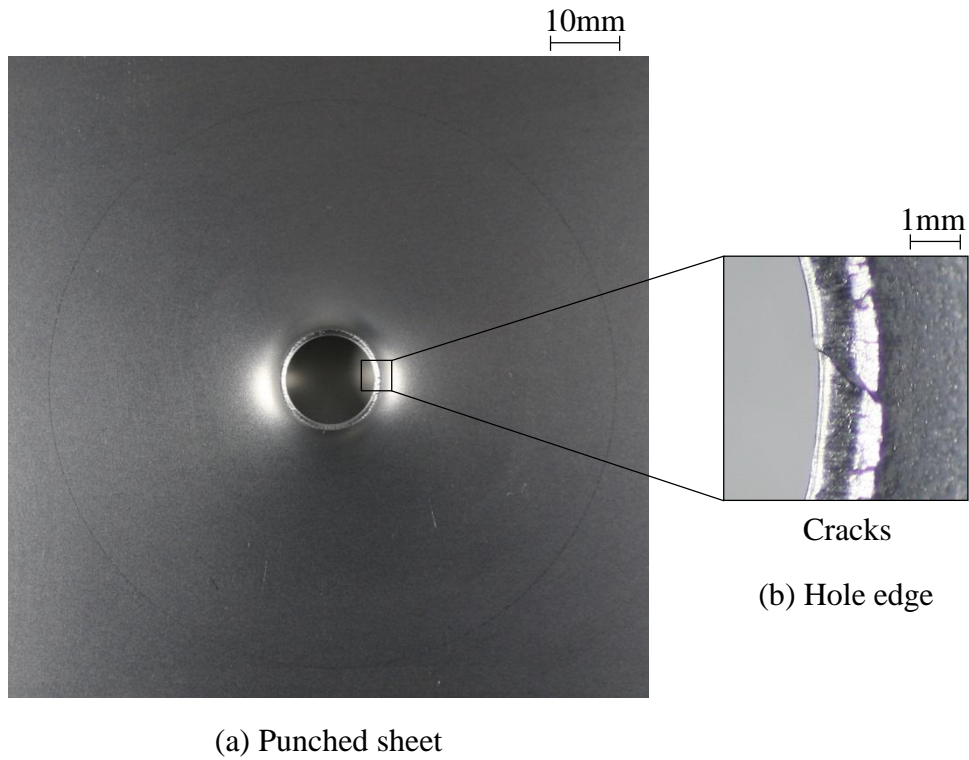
Cracks just driven through thickness caused by hole expansion at sheared edge for $c = 0.8\%$, $R = 0.15\text{mm}$ and JSC980Y.
